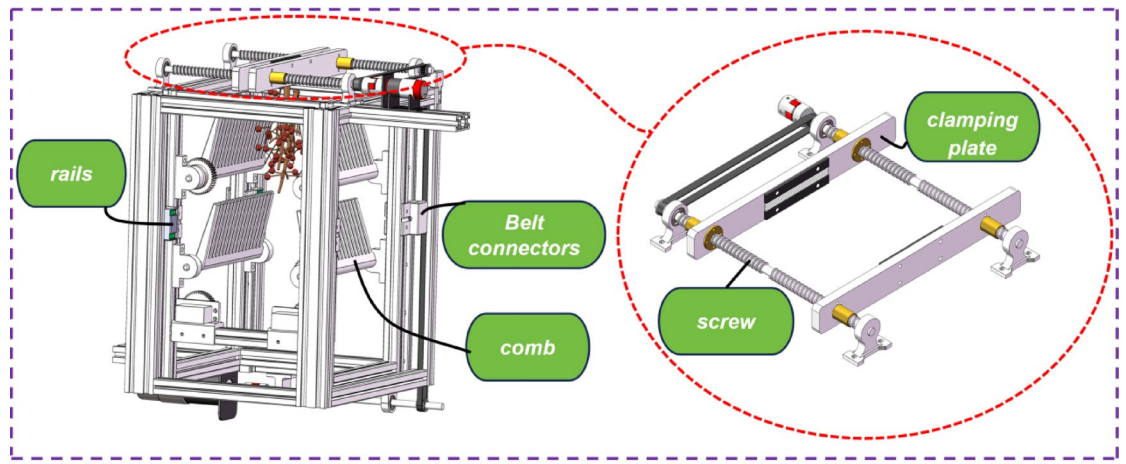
The structure of the whole machine of the Idesia Polycarpa Maxim picking machine.
